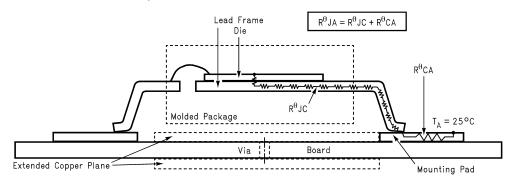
Cross-Sectional View of Integrated Circuit Mounted on a Printed Circuit Board
